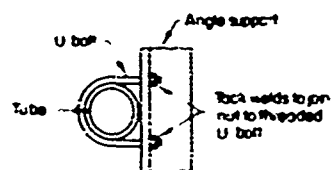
TACK-WELDED MECHANICAL FASTENERS FOR THE COIL SPACERS SHOWN IN FIGURE 25 (REF. 21)
